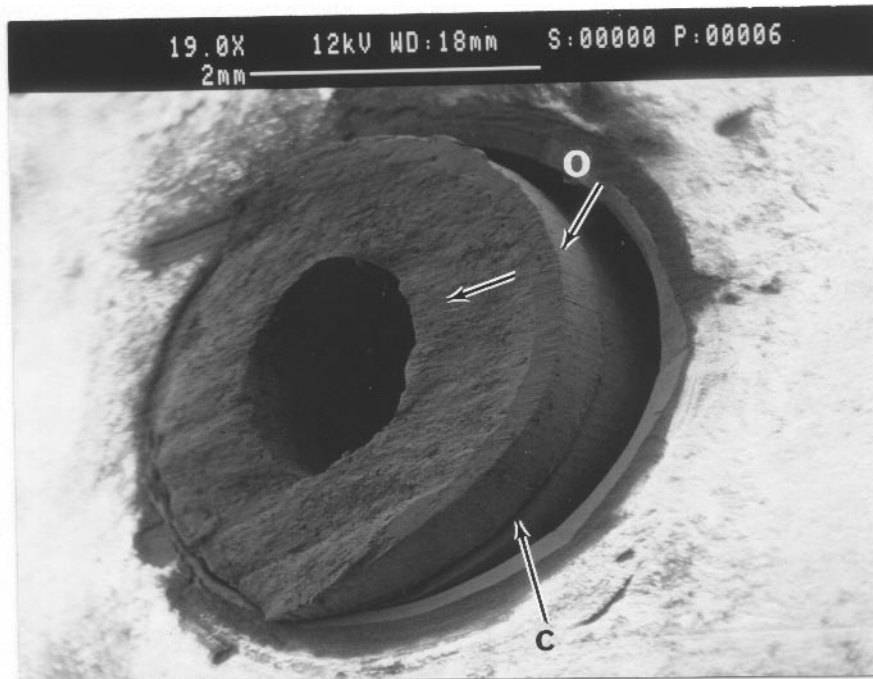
SEM view of the fracture surface on the rivet indicated by arrow "rv" in figure 26. Arrow "o" indicates the origin of fracture, the unlabeled arrow indicates the direction of the fracture, and arrow "c" indicates the circumferential crack. (19X).
